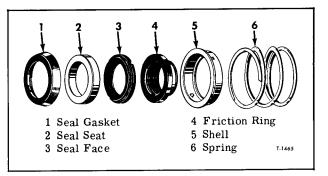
Hydraulic Pump and Motor Shaft Seal Components
